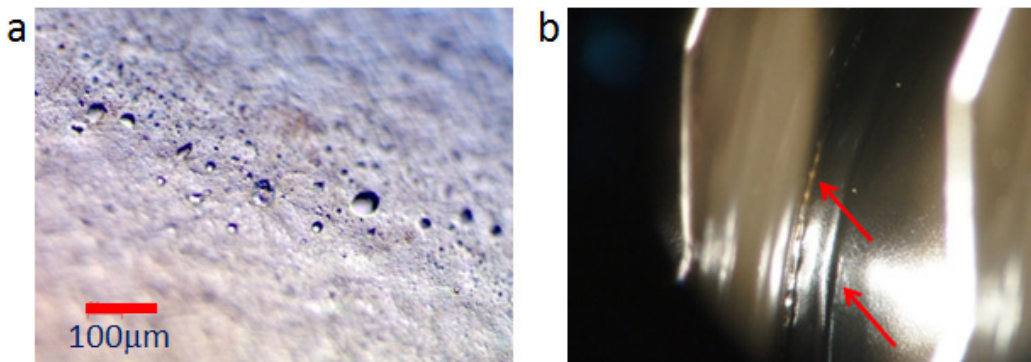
(a) Fin edge defects; (b) Cu-Al connection defects.
